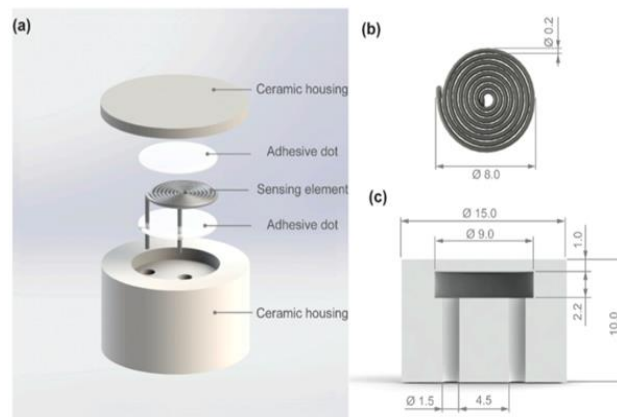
Schematic of sensor structure: (a) Exploded view of the sensor; (b) Top view of the sensing element; (c) cross-section of the ceramic package.
